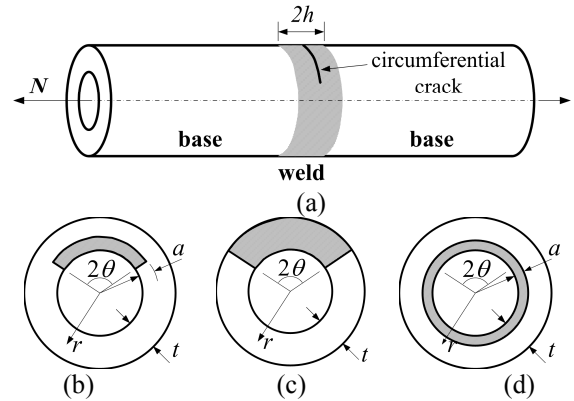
(a) Schematic pictures of pipe with circumferential crack at the center of weldment. Crack shape considered in this work are (b) part through surface crack, (c) through-wall crack and (d) fully circumferential surface crack
